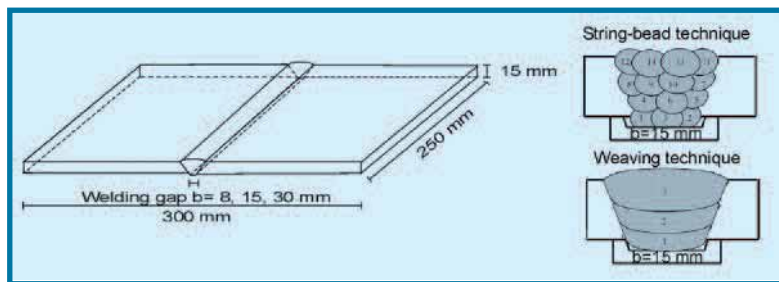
Geometry of the specimens (left) and welding technique (right).
